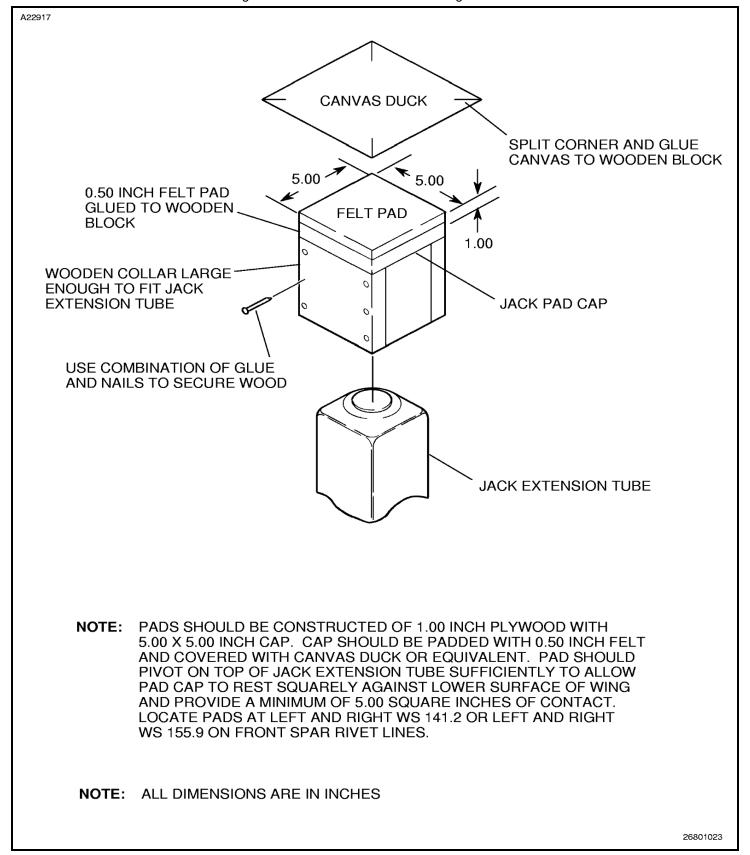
Sheet 1: Fabrication of Wing Jack Pad
